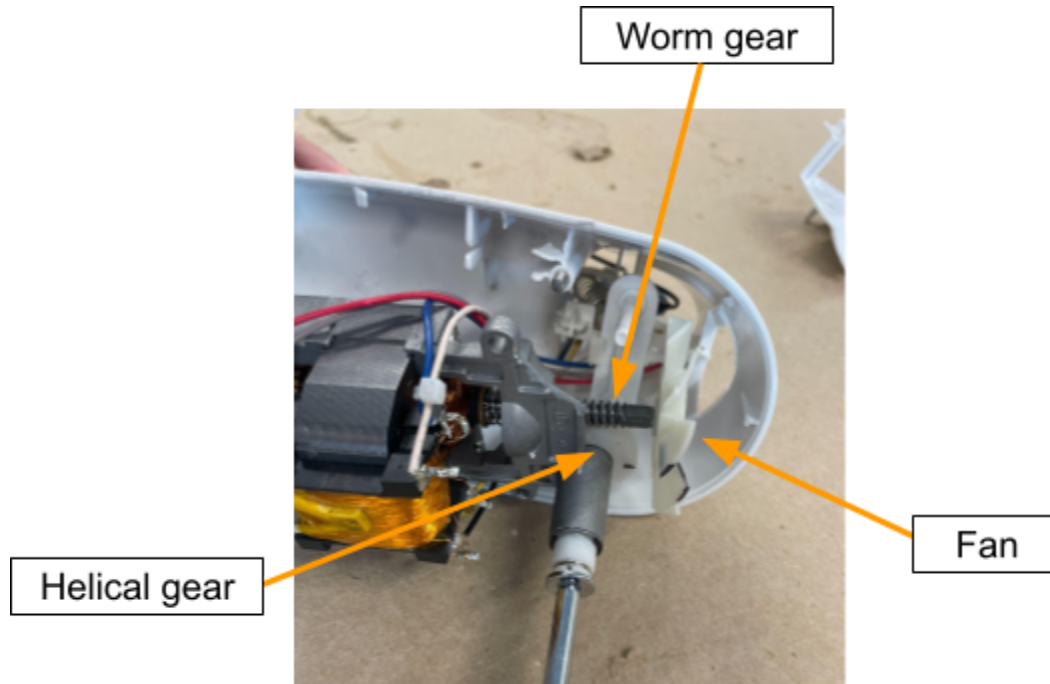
Annotated photograph of inner system, including how the motor connects to gears that turn the whisks.
